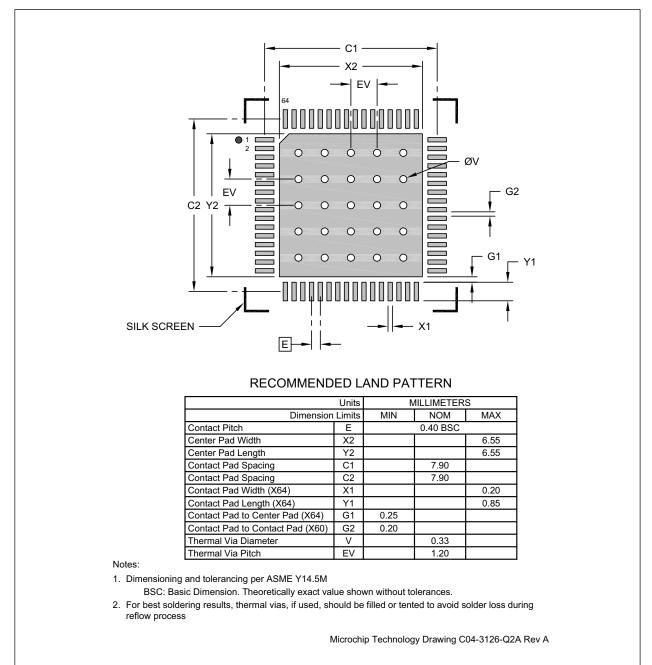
64-LEAD VERY THIN PLASTIC QUAD FLAT, NO LEAD PACKAGE (Q2A) -8X8X0.9 MM BODY [VQFN] WITH 6.5 MM EXPOSED PAD (DIMENSIONS)
